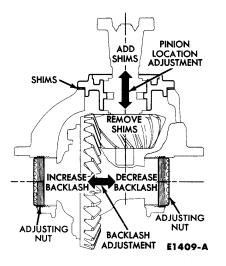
Pinion and Ring Gear Tooth Contact Adjustment
